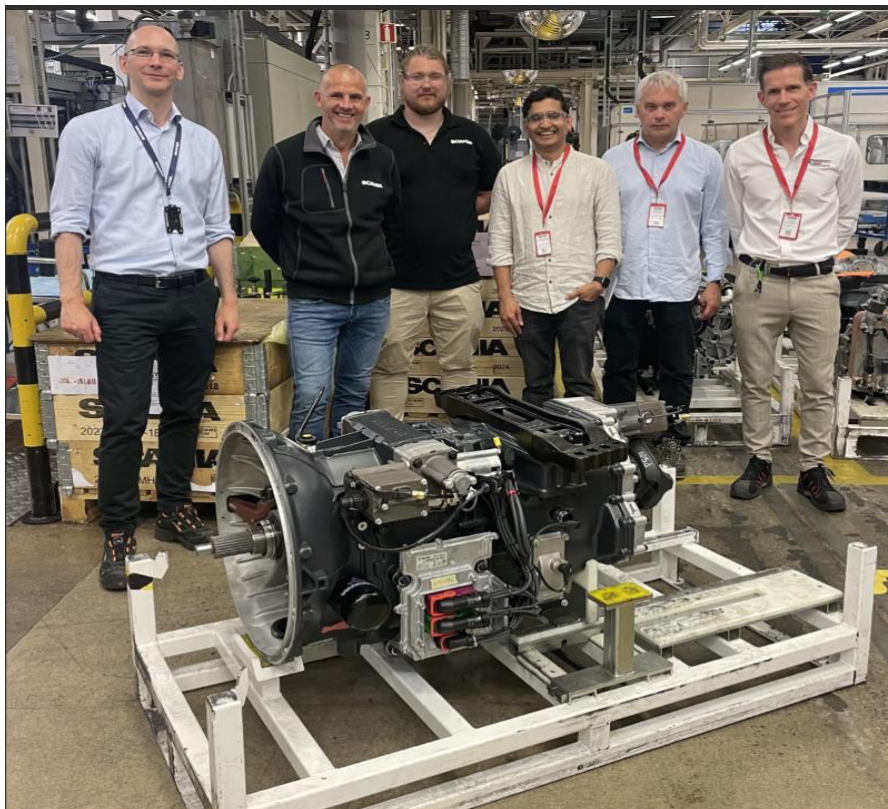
A few members of the project team who witnessed the event are standing behind the remanufactured gearbox that has completed the integration and testing process (courtesy: Scania).
